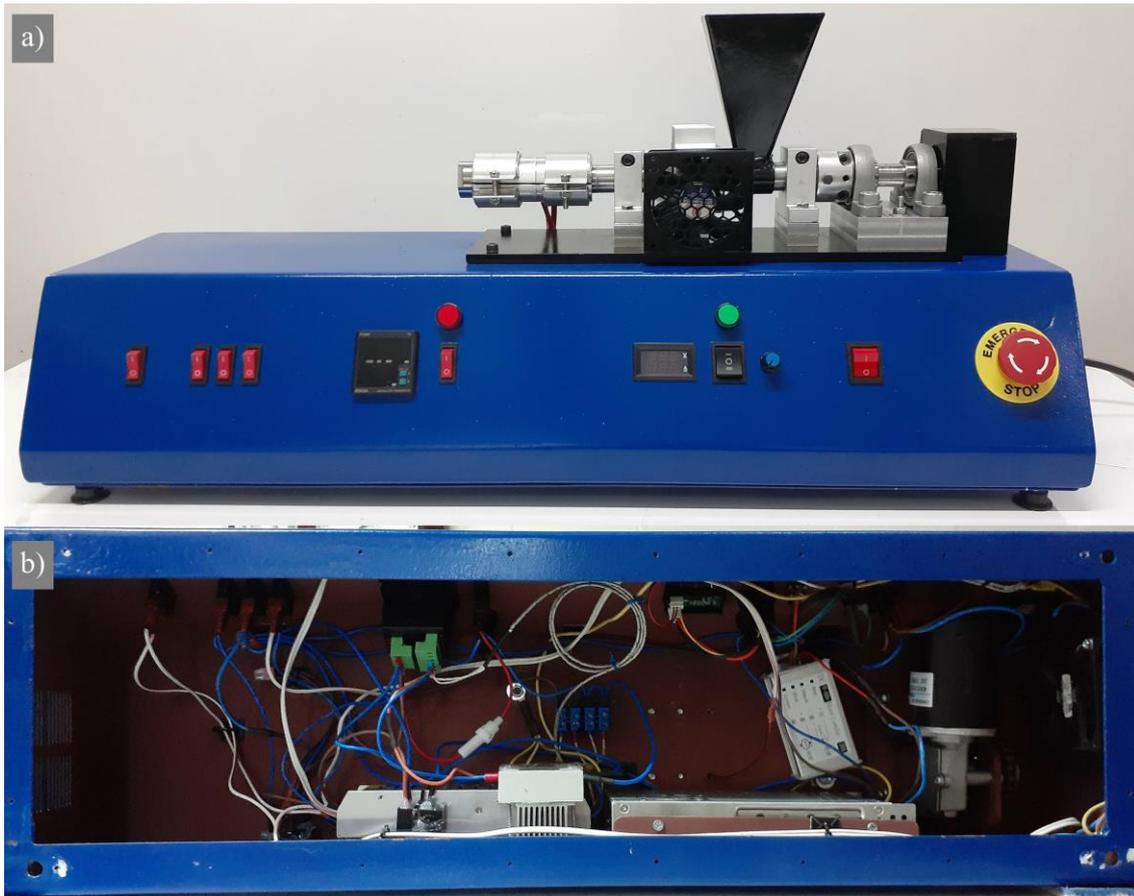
Final extruder, a) an overall view and b) when bottom sheet removed
